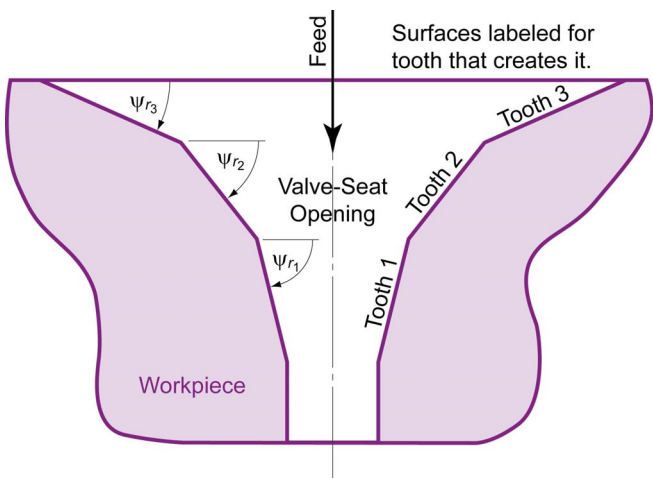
Valve seat cross-section geometry showing tooth that creates each facet.8
